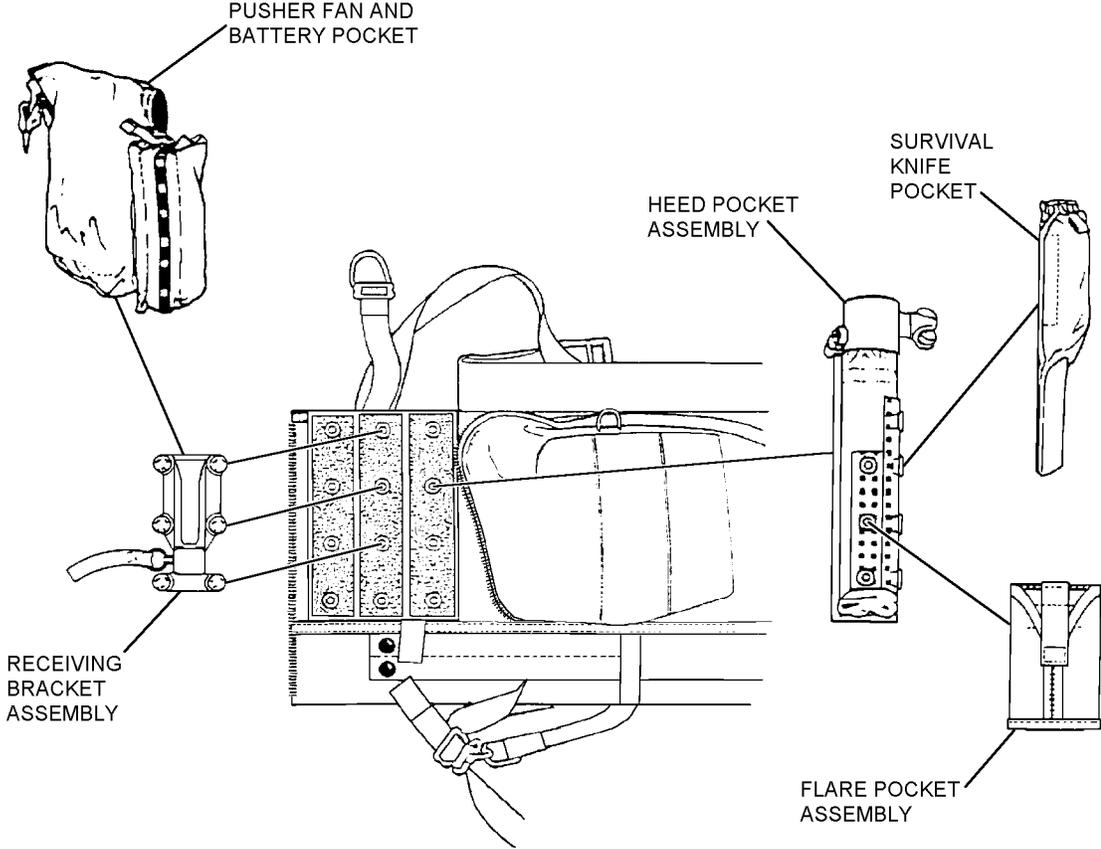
Attachment of CMU-23A/P Survival Vest CBR Components
